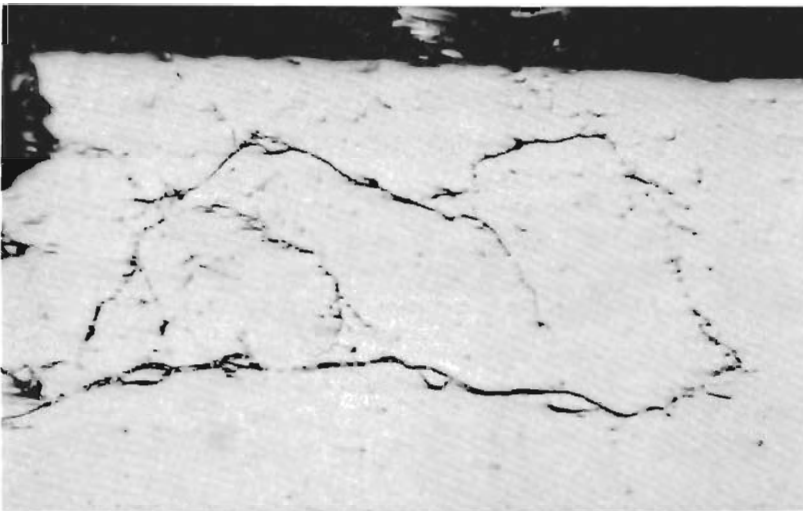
Gear tooth section, 100 \times . Unetched. Rolling contact fatigue. Crack origin subsurface. Progression parallel with surface, inward, and finally to surface to form a large pit or spall.
